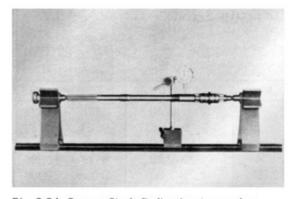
Output Shaft Deflection Inspection
